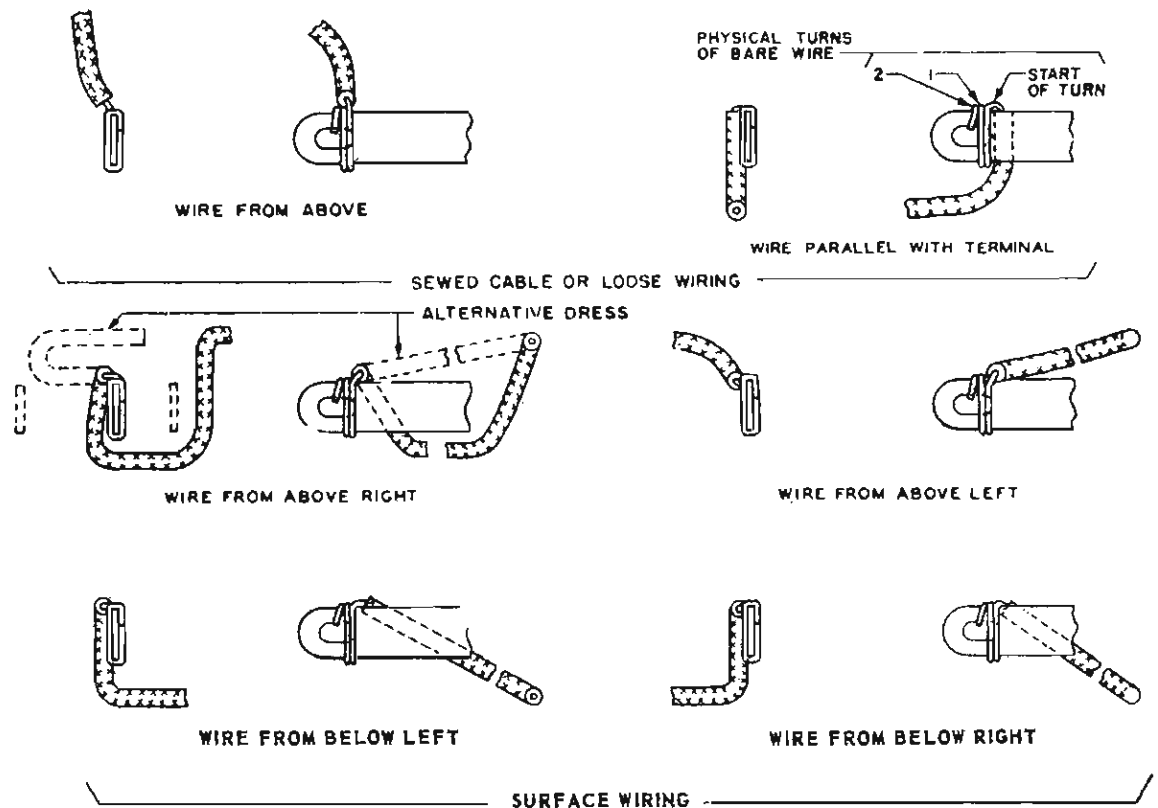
SOLDERED-WRAPPED CONNECTIONS -
